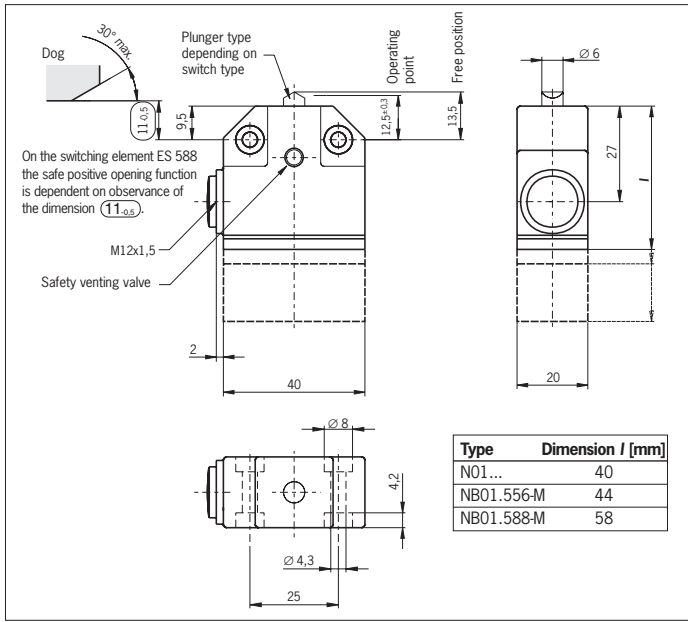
Dimension drawing NO1.../NB01... with cable entry
